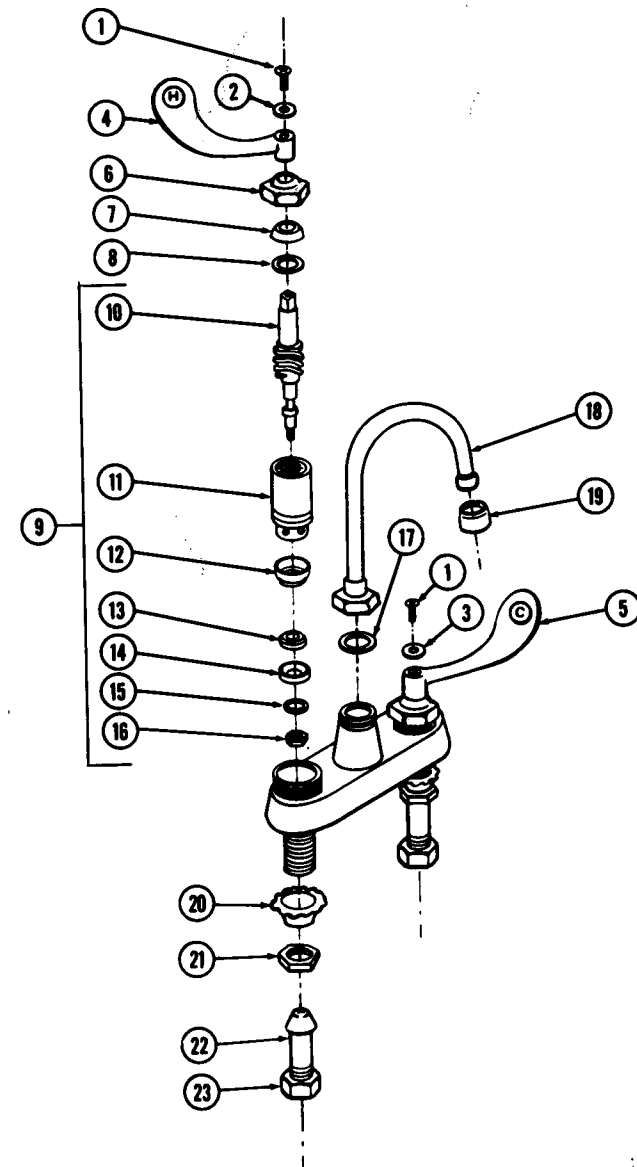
FAUCET ASSEMBLY WITH GOOSENECK SPOUT.
